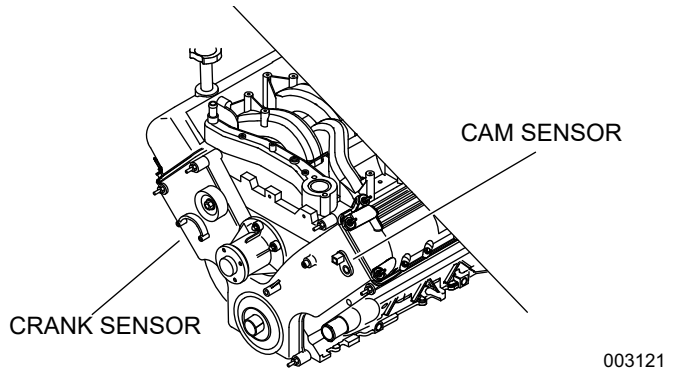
G4.6L, G5.4L and G6.8L Cam Sensor/ Crank Sensor
